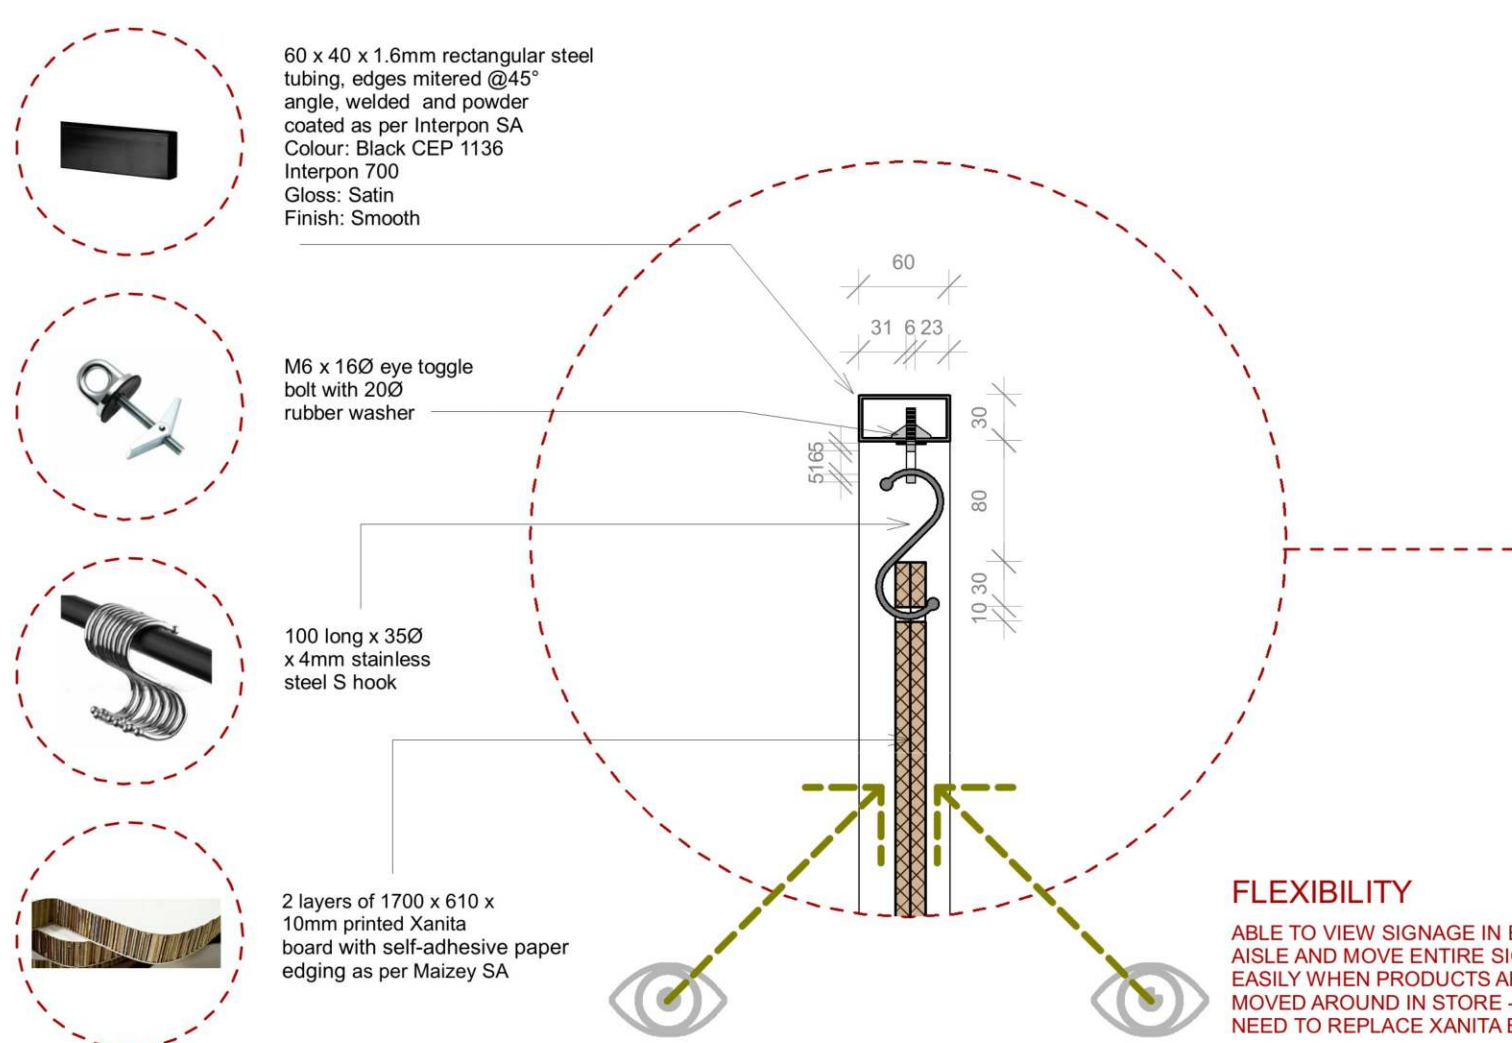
AISLE MARKER [JOINT INSTRUCTIONS]
